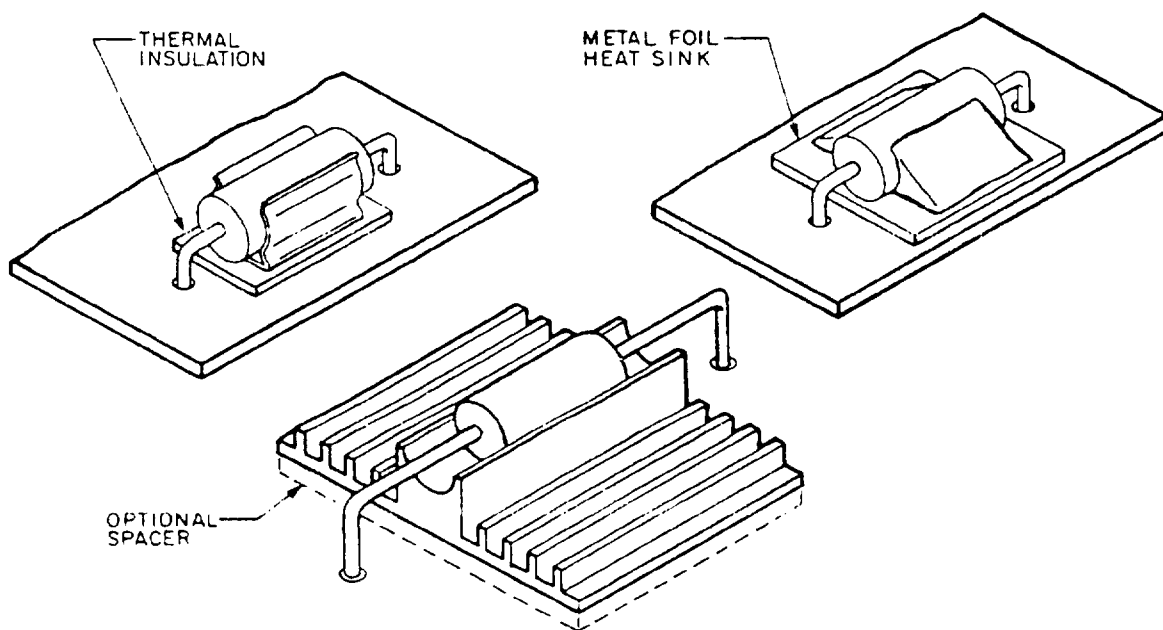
Typical heat sanked axial-leaded components (see 5.3.19.7.2).
